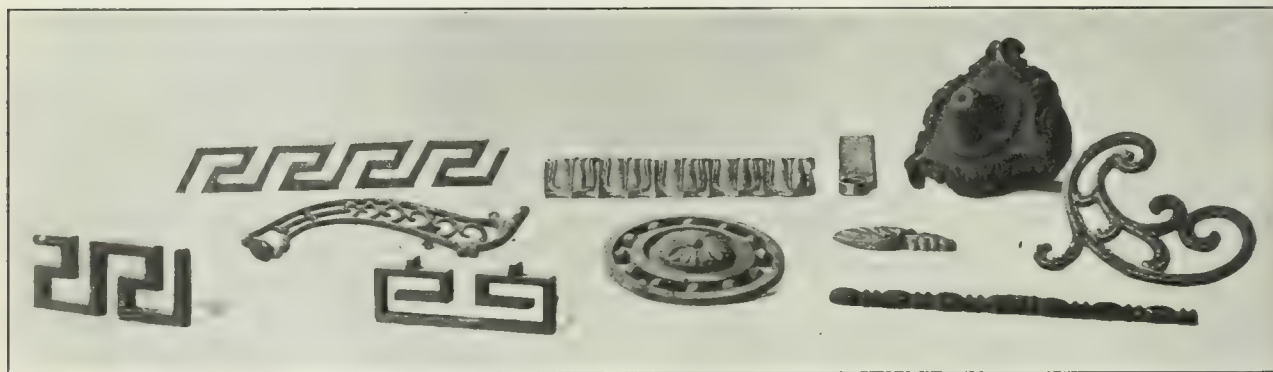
Ornamental Gray Iron Castings Made in Permanent Molds.
